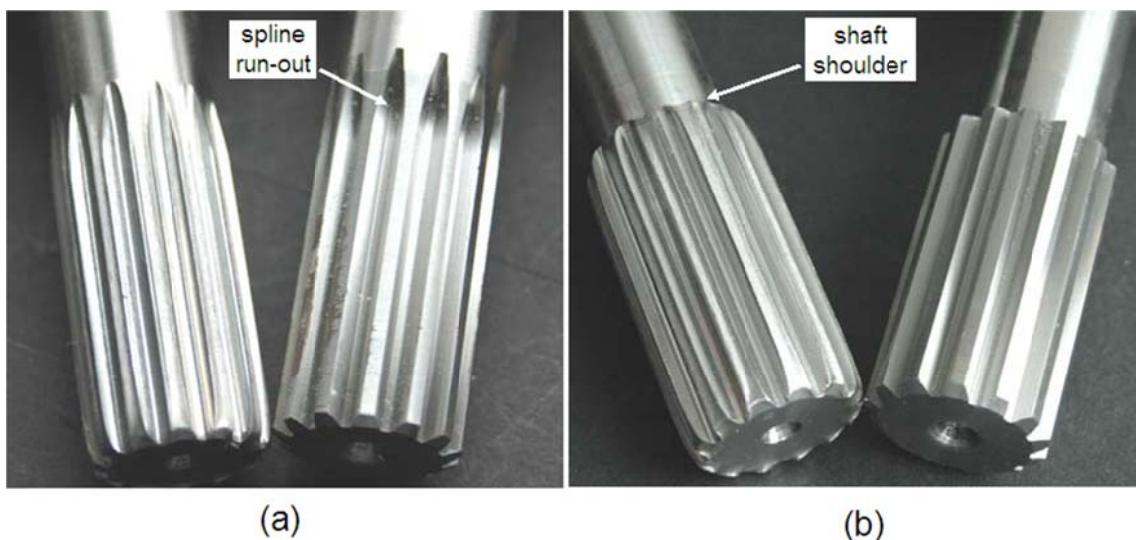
Different spline shaft design in axial direction, (a) with spline run-out; (b) with shaft shoulder: after [FVA-08]
